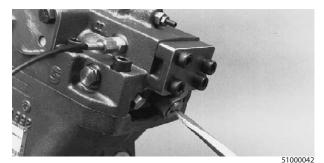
Adjusting Charge Pressure Relief Valve
